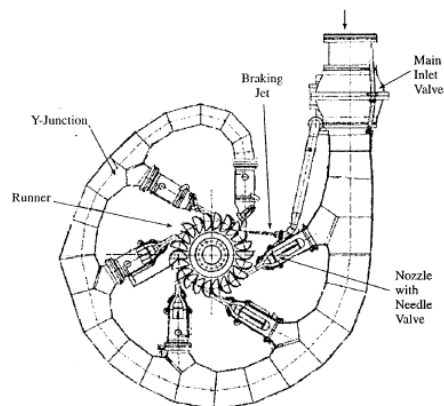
Schematic sketch of the manifold and jet arrangements in a six-jet Pelton turbine
